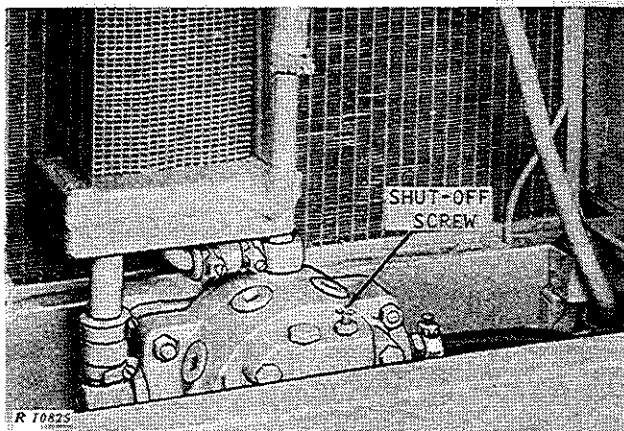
Hydraulic Pump Shut-Off Screw
